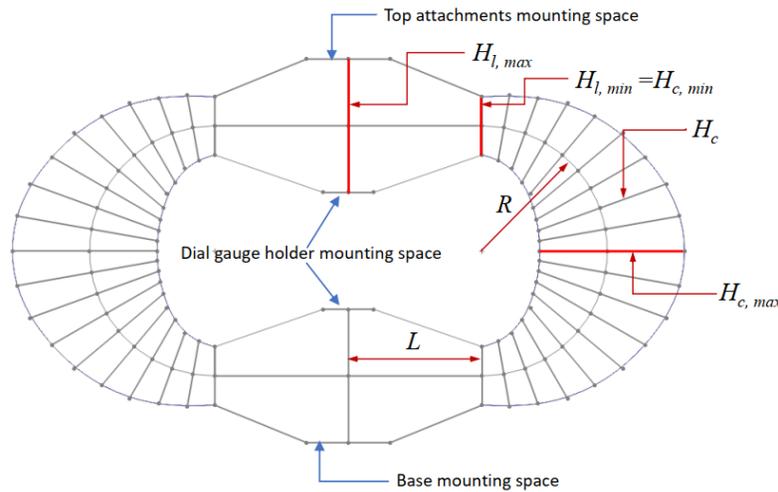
Modified 2D front view of the basic structure of the proving ring with necessary mounting spaces
